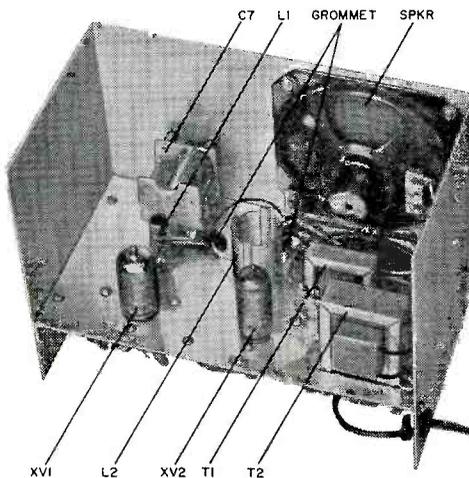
Assemble major components on the chassis at the locations shown. Be sure to use four 3/8"-long spacers between capacitor C7 and front panel.
